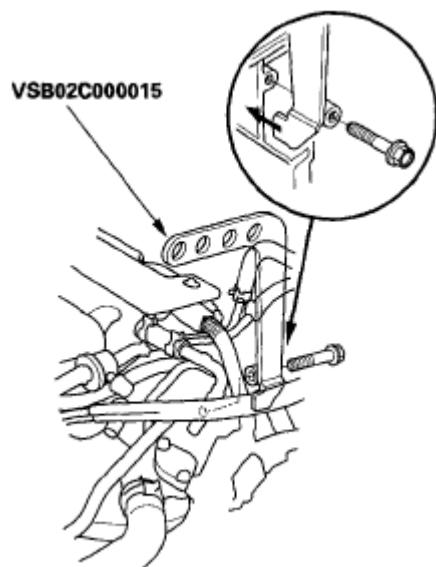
Identifying Special Tool To Threaded Hole In Cylinder Head
